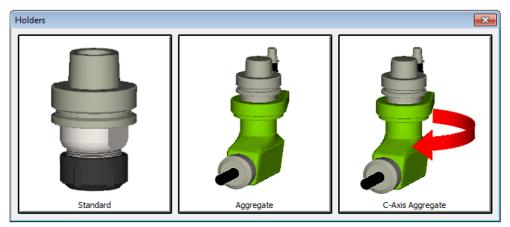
Tool Holder Selection options for Defining New Holder in Mill / Stone
